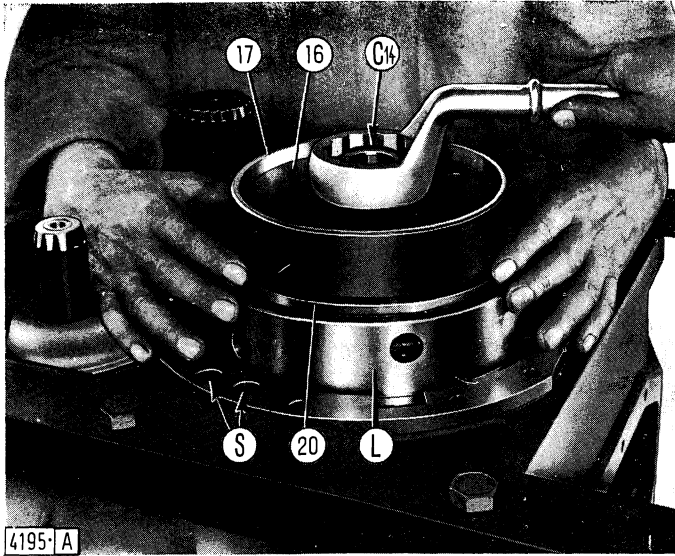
Removing (or Refitting) Thrust Plate Outer and Inner Return Springs
